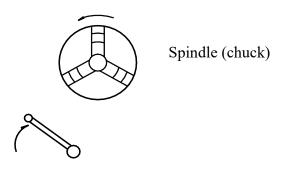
Relation between operating handle for spindle forward and reverse and rotating direction of spindle (for 3m and less than 3m, viewing in front of the chuck)
